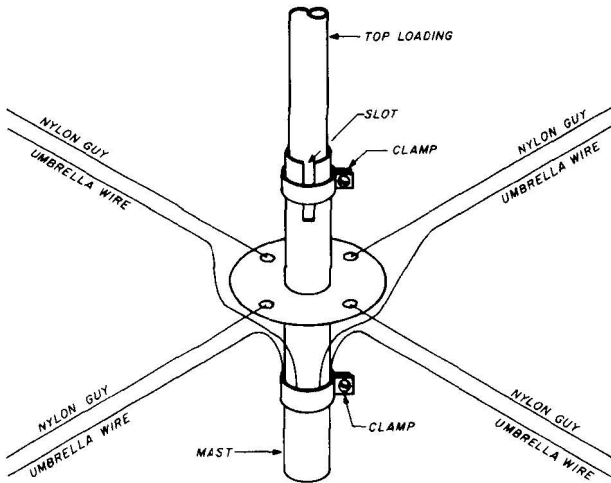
Detail showing attachment of top guys, "umbrella" wires and top loading whip.
